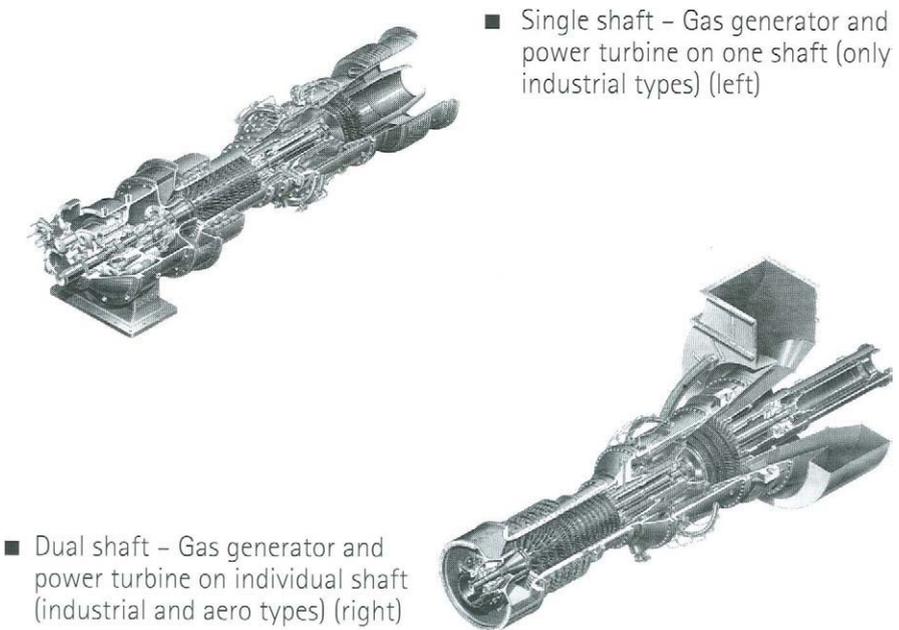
The number of gas turbine shafts (Courtesy of Solar Turbines, Inc.)
